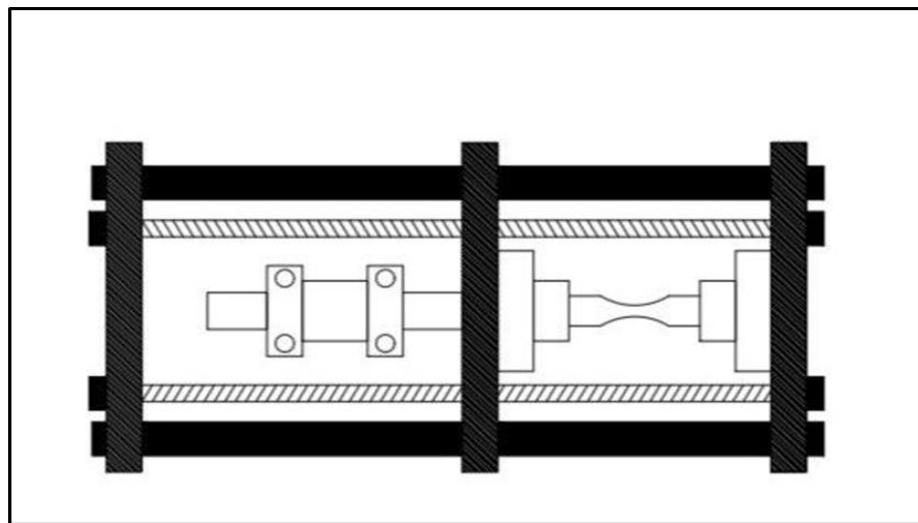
Top view of Pneumatic Axial Stress testing machine [AUTOCAD]
